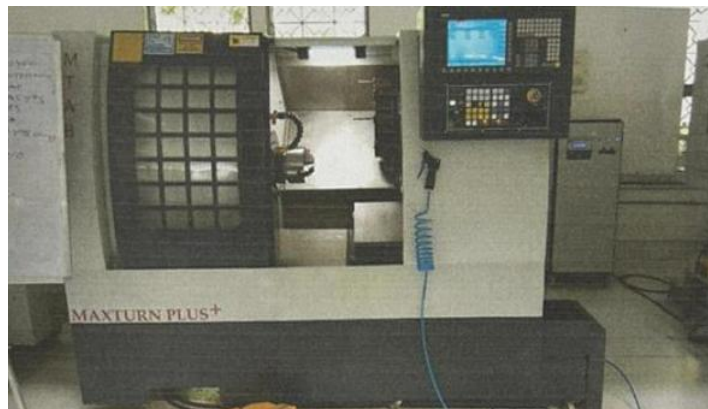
CNC lathe machine with ATC (Automatic Tool Change)
